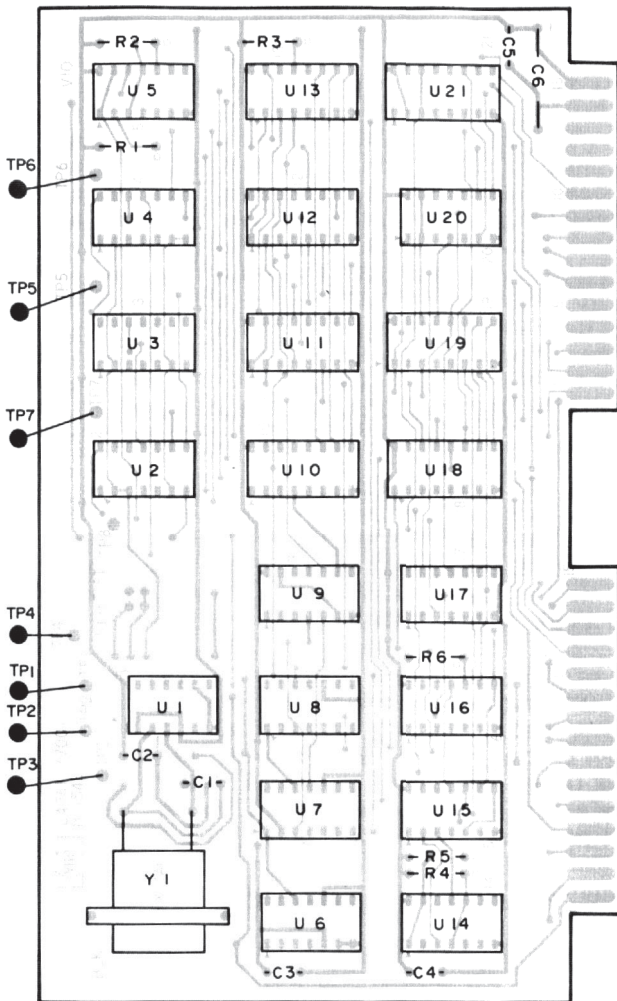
A7 Clock Pulse Generator/Counter Board Assembly
